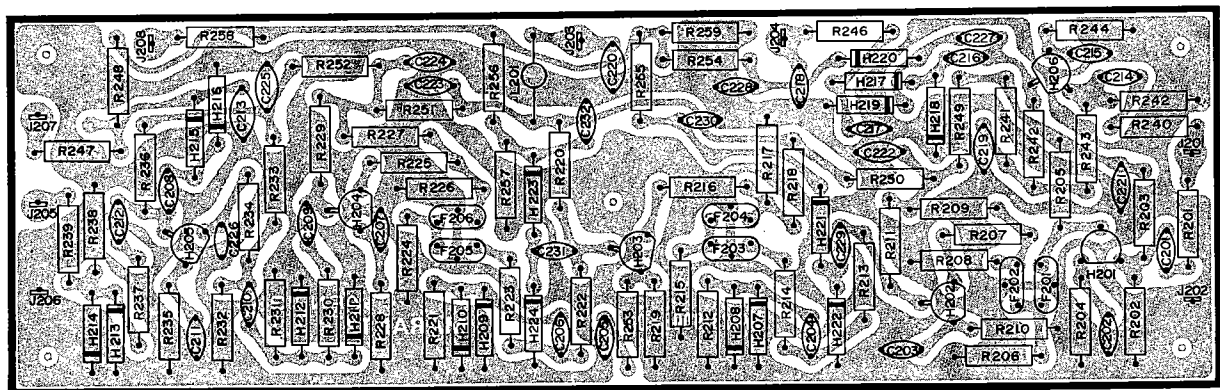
FM IF Amplifier Assembly P200 Component Locations
